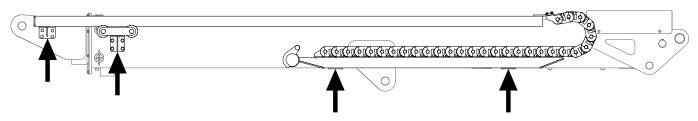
Fastening bolts on drag chain assembly -GTZZ14EJ
